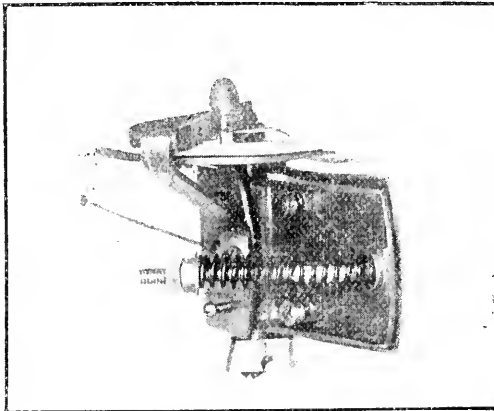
PHOTOGRAPH OF INDICATOR.
